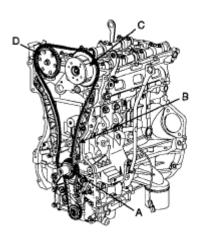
Aligning Mark Of Timing Chain With Crankshaft Sprocket Courtesy of HYUNDAI MOTOR CO.
